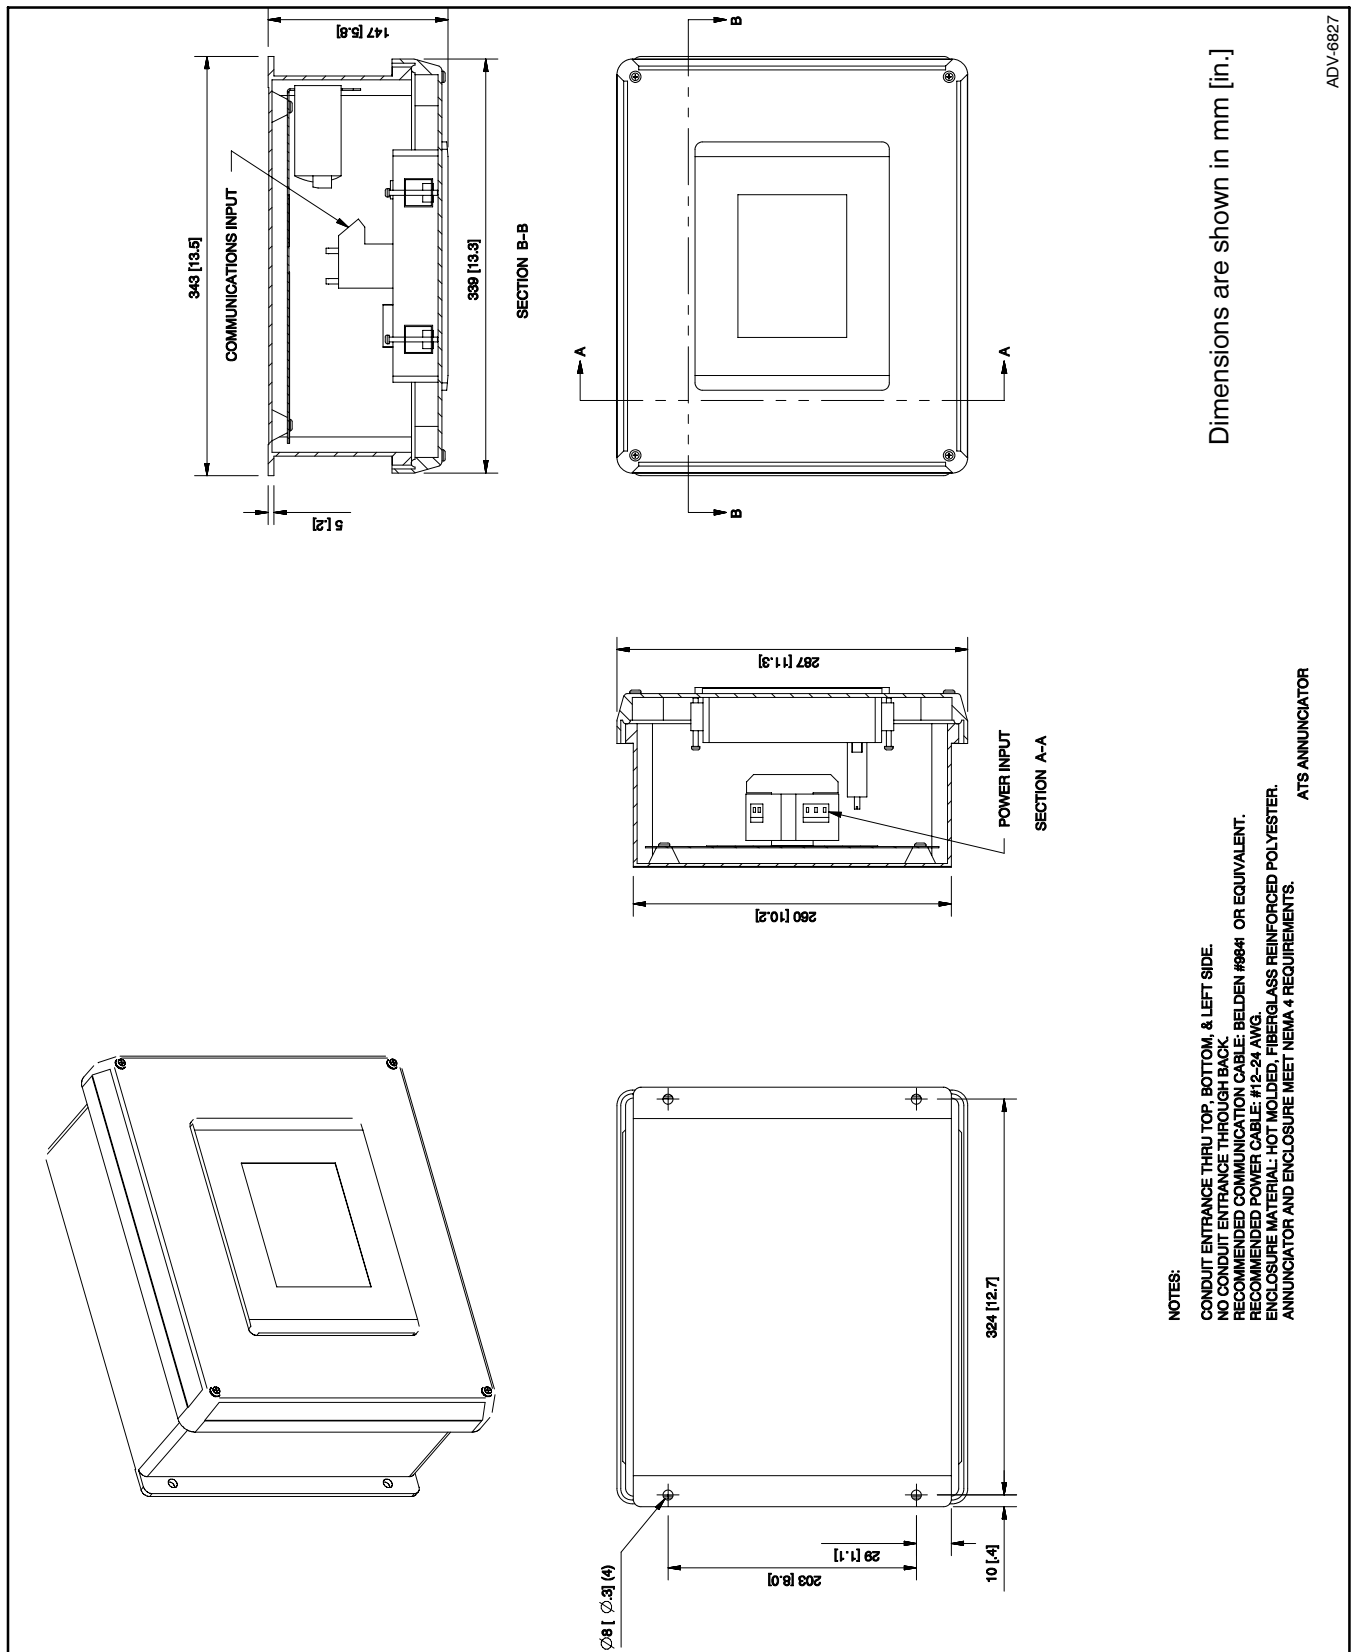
Dimension Drawing, NEMA 4 Enclosure, Kit Part Numbers GM49279-KP1 and GM49279-KP1S
